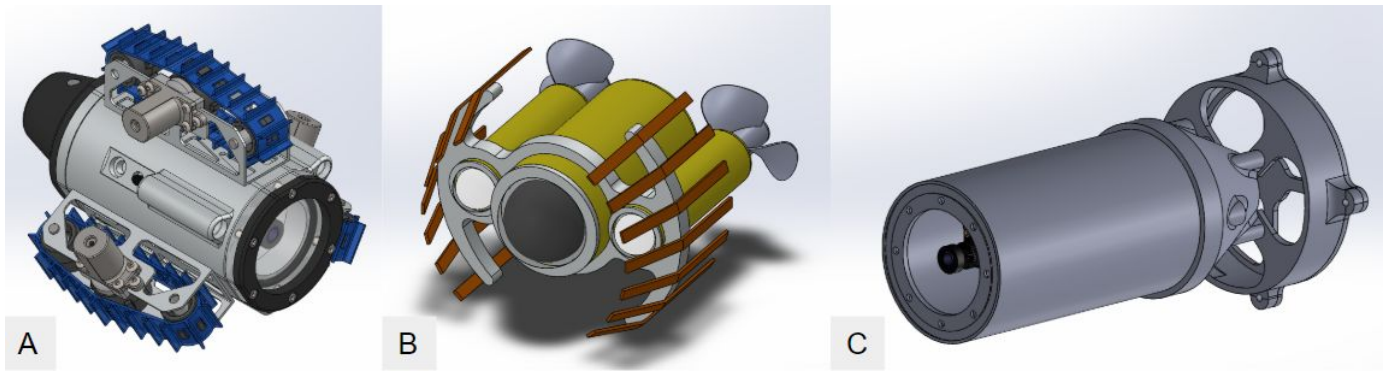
Initial tracked CAD design (A), initial dual-thruster CAD design (B), final single-thruster CAD design (C).
